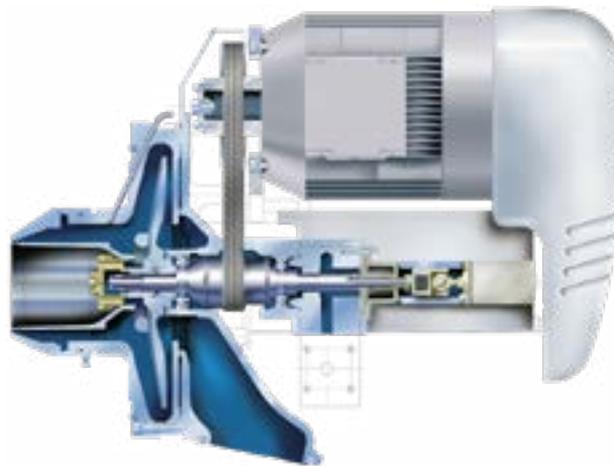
Sectional view of a rotary atomising burner (Saacke)
